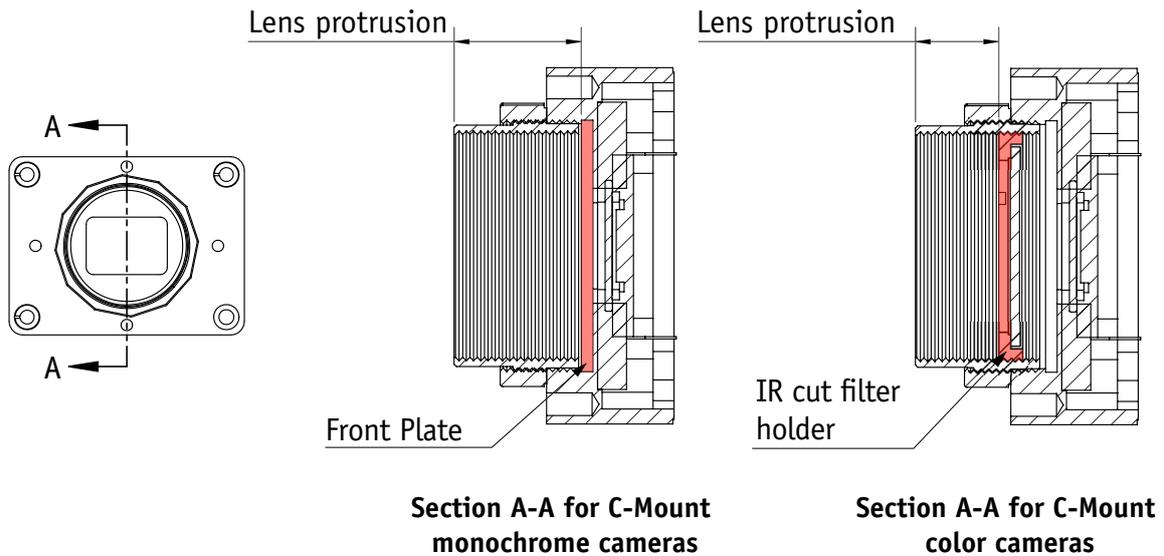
Cross section of typical Prosilica GE front assembly with C-Mount
